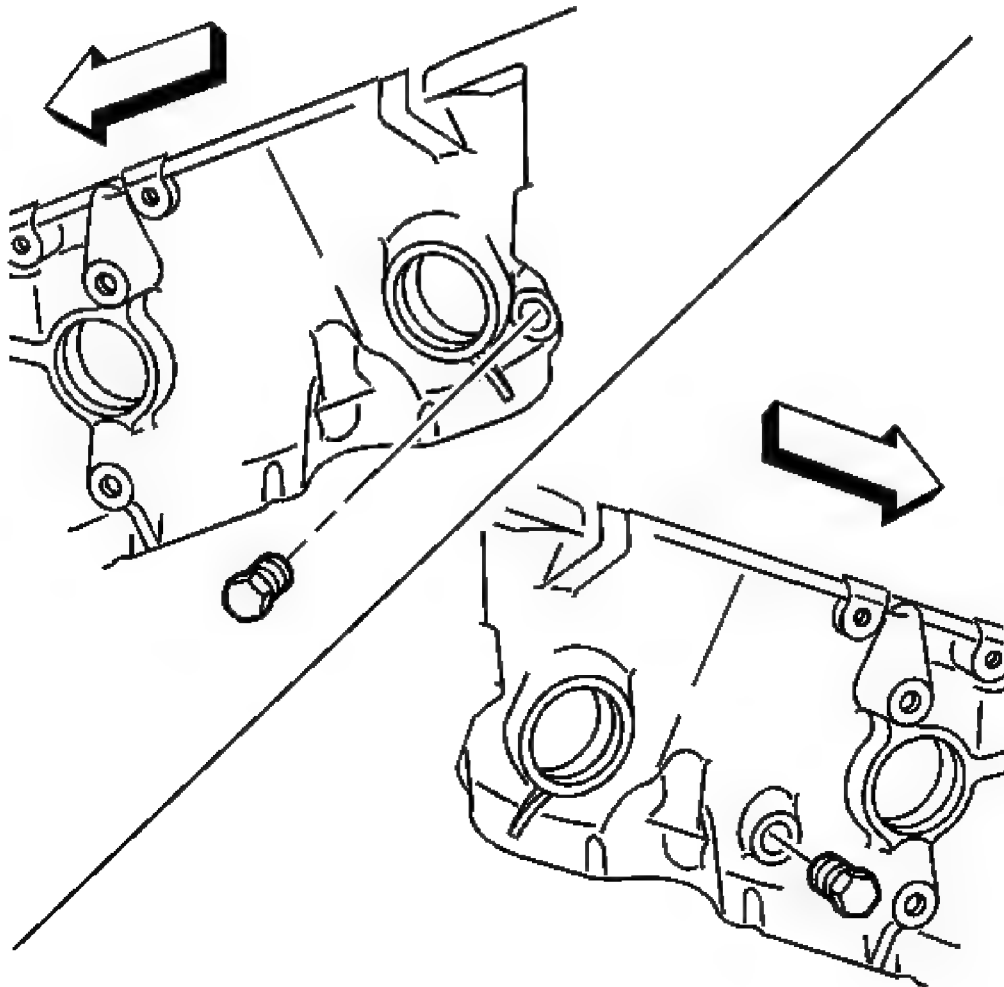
View Of Engine Block Coolant Drain Hole Plugs
